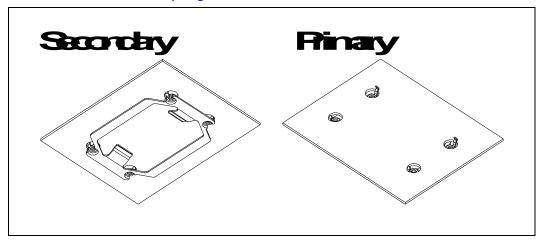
Isometric View of Hat Spring Attachment to the Base Board
